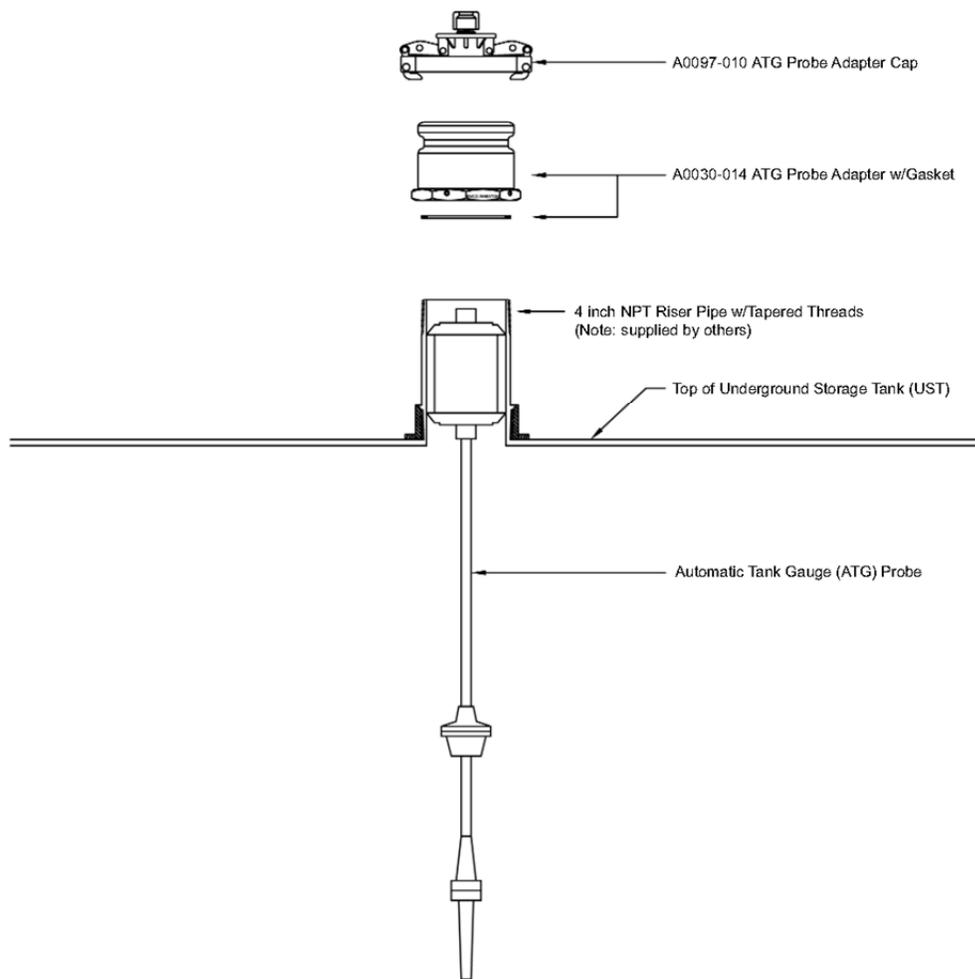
Installation Instructions for Multi-port Containment Assembly
